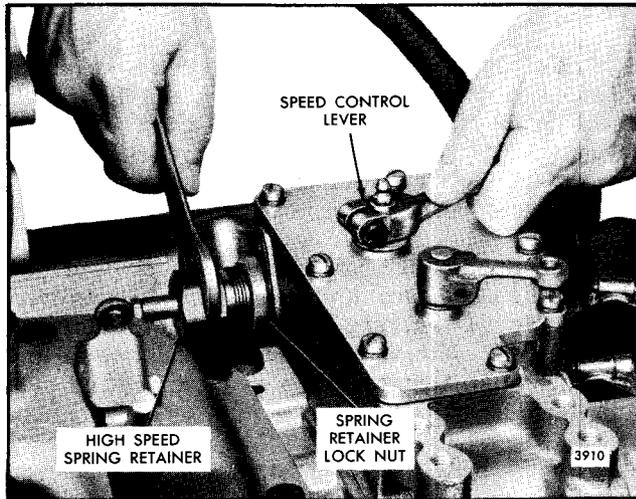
Adjusting Maximum No-Load Engine Speed
